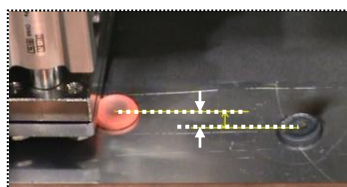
Examples of weld joints where pre-hole misalignment was automatically detected for position adjustment
